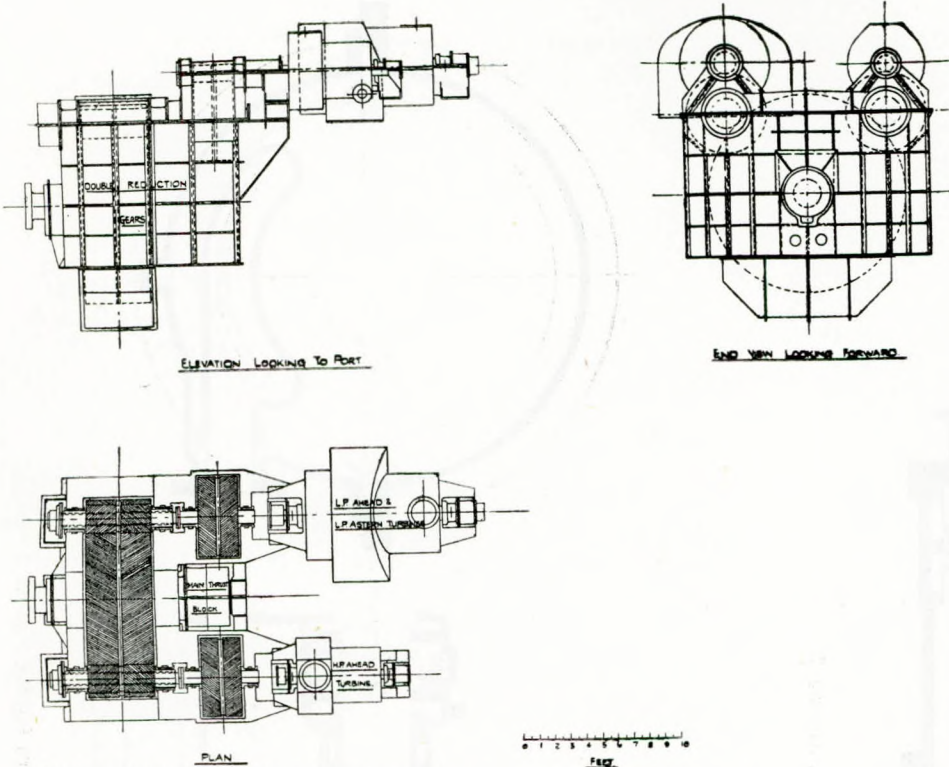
Engine-room layout, 7,500-s.h.p. unit, Scheme 1.
